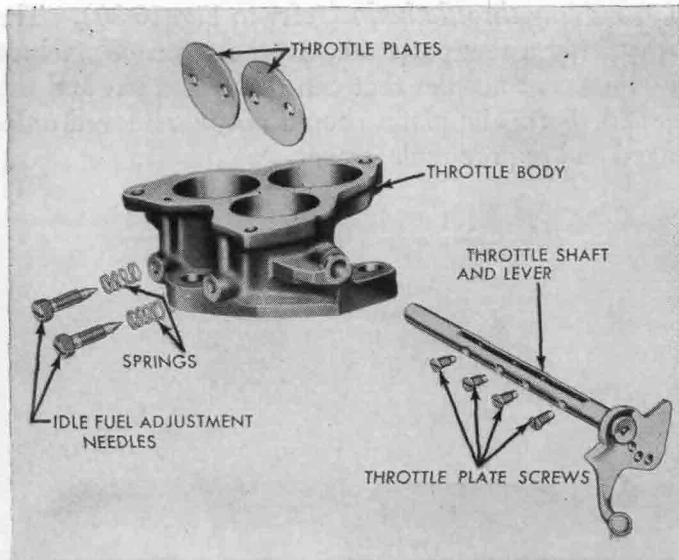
Throttle body disassembled. (Ford Motor Company)
